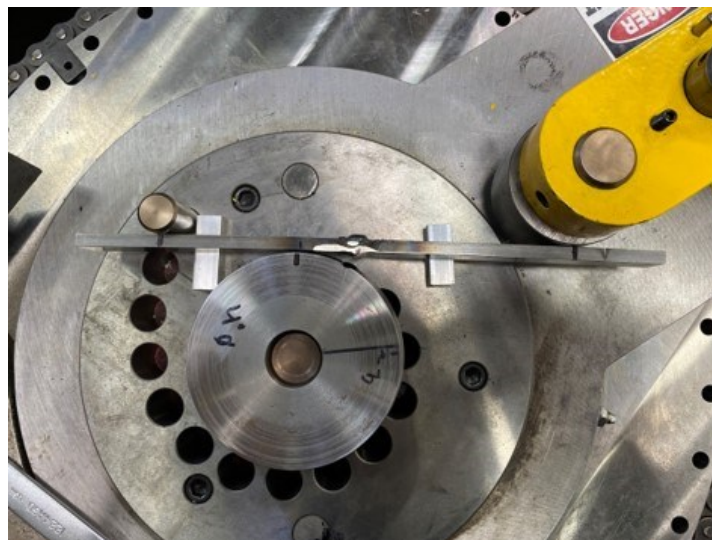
Picture of a specimen subjected to the mechanical bending process.
